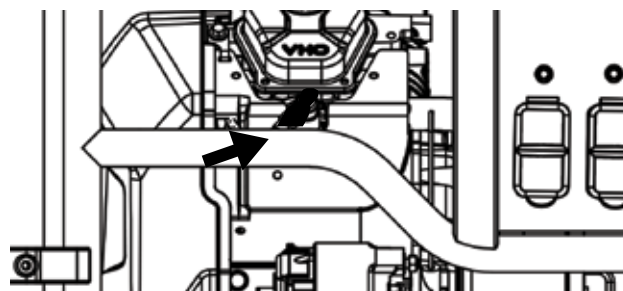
Remove Spark Plug Boot (WPro12000 shown)
